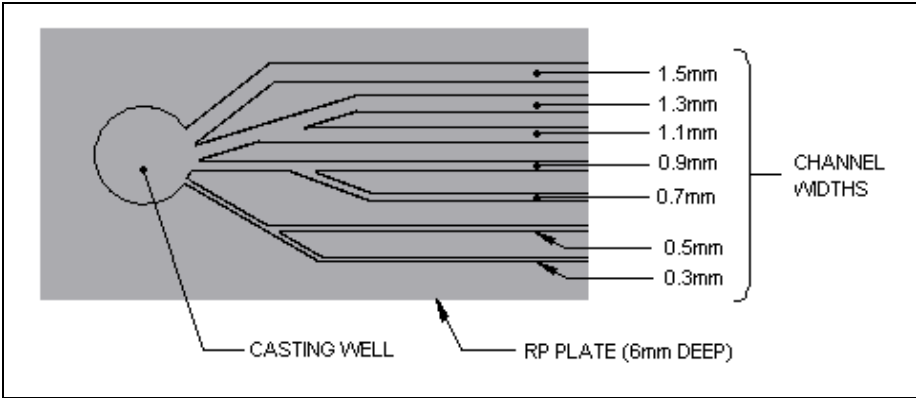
Plan view of channel widths ranging from 0.3mm to 1.5mm
